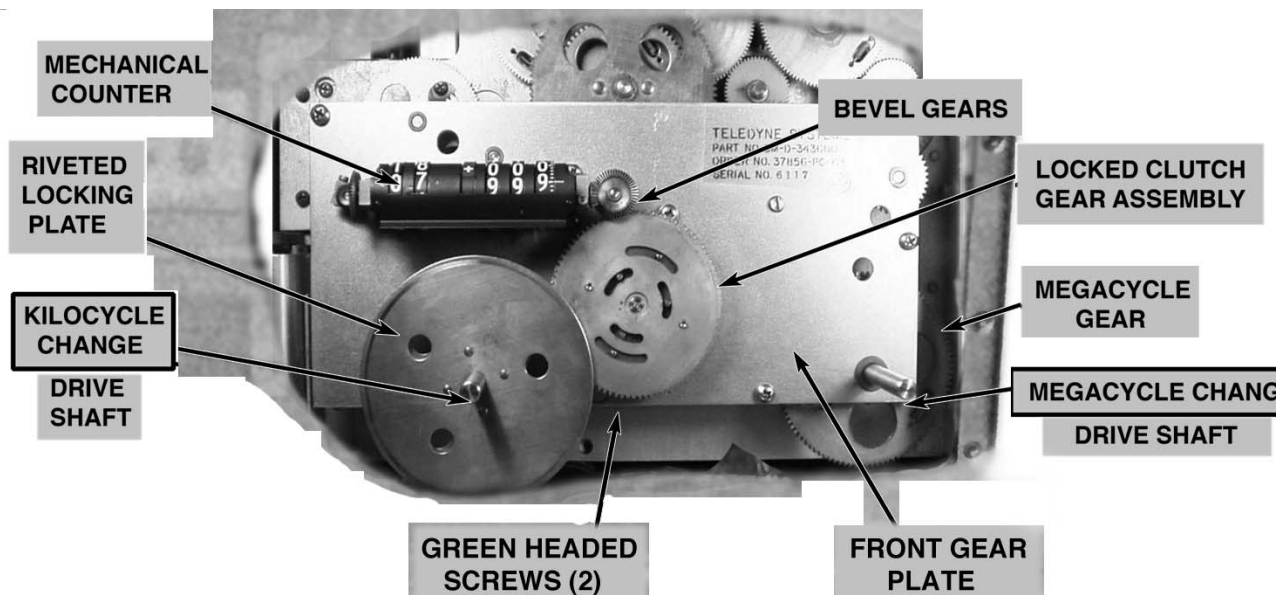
RF Gear Train Assembly, Location of Parts-Norris
